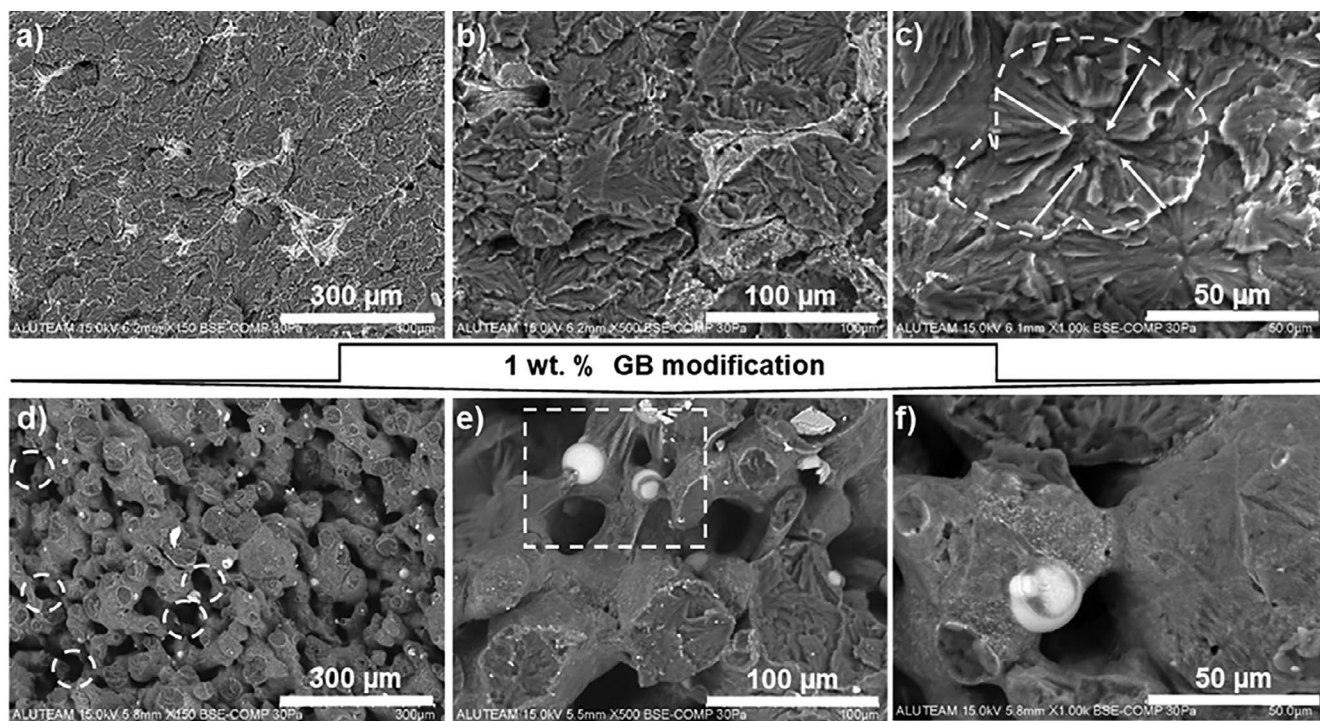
| Fracture surfaces of virgin PA12 (a–c) and 1 wt.% glass bead-modified PA12 (d–f) parts after impact test.
